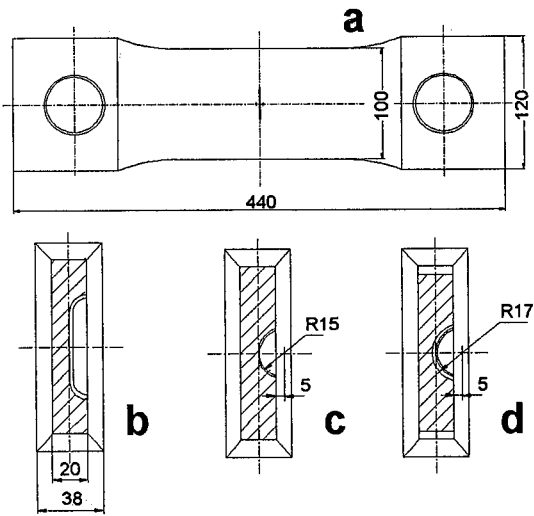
Principal dimensions of the panel including a surface failure (a); b: specimen without side-grooves; c, d: side-grooved specimen before and after fatigue precracking, resp.
